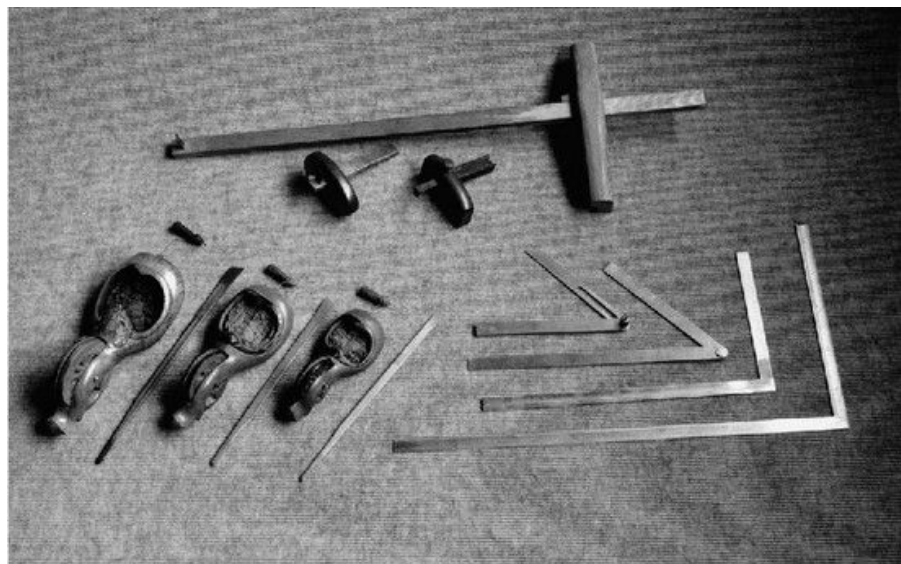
Layout and marking tools. Top: One large and two small marking gauges. Lower left: Three inkpots with line and bamboo marking pens. Lower right: Two steel adjustable bevel gauges, a small square, and a regular square.
